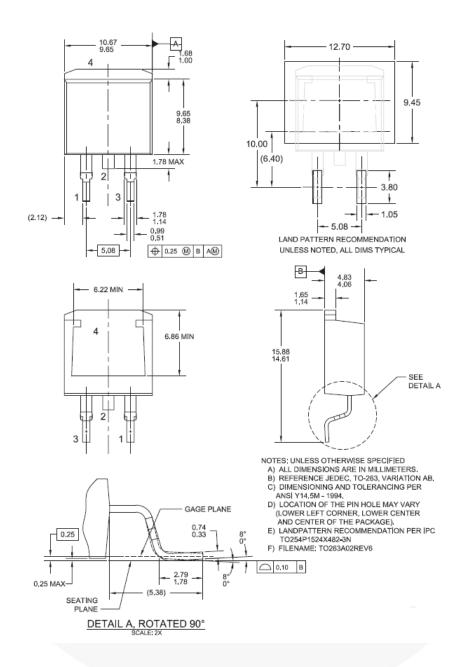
TO263 (D²PAK), Molded, 2-Lead, Surface Mount
